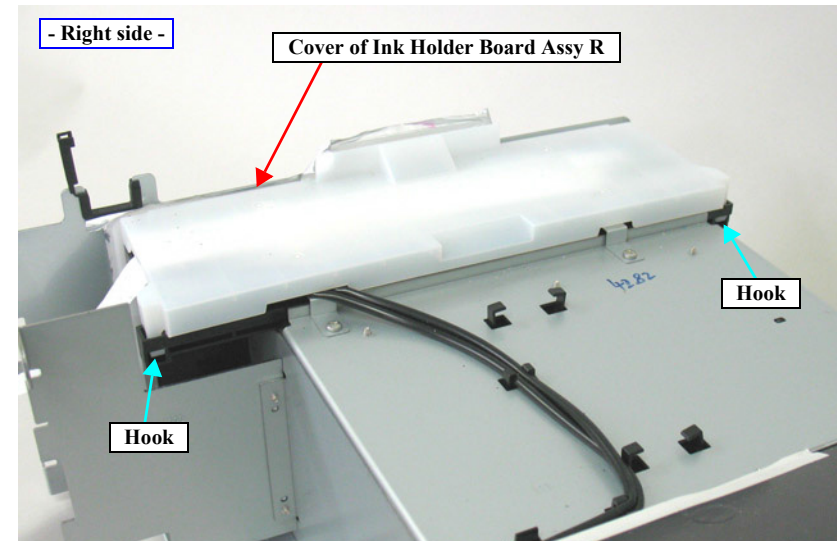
Removing the cover of the Ink Holder Board Assy R
